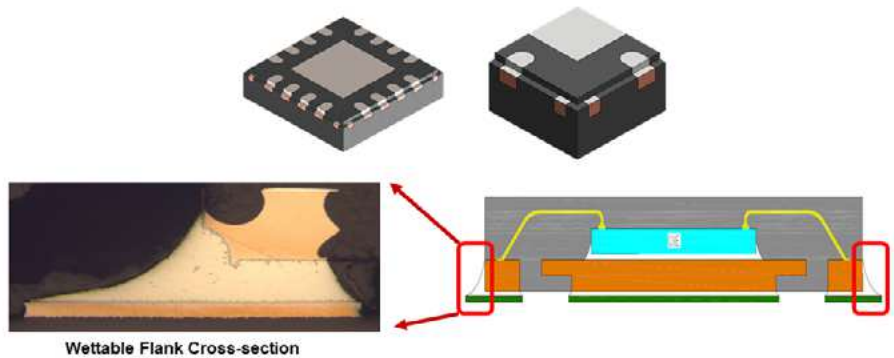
The automotive industry requires side-solderable QFNs allowing inspection of the board-level solder joint.
